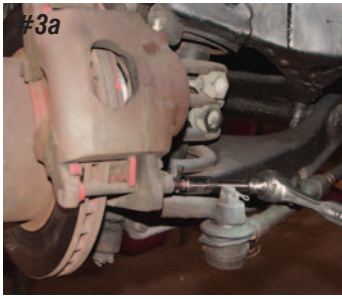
& 3b: Next remove the two the caliper anchor pins from the caliper and the caliper assembly and hose can be removed from the spindle.
